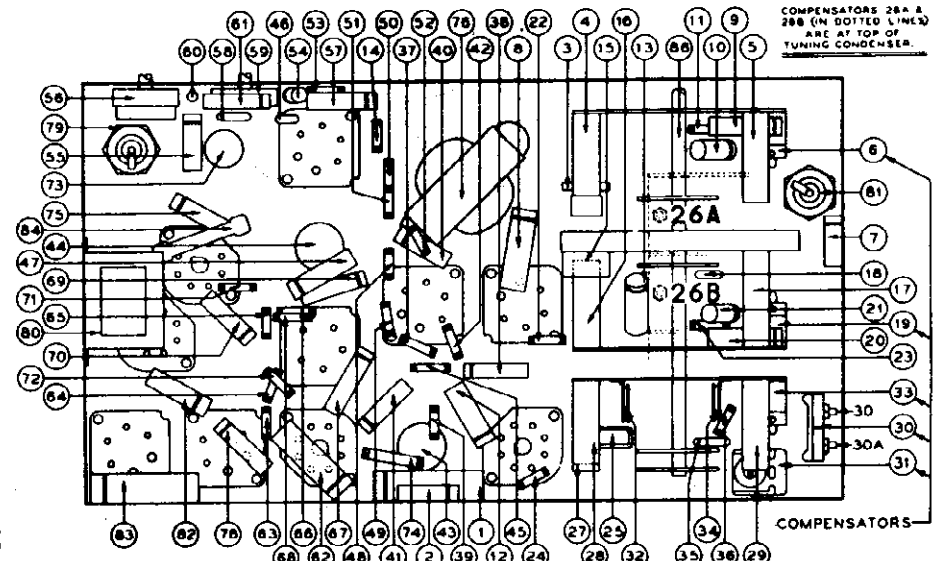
Part Locations, Model 39-751, Underside of Chassis
